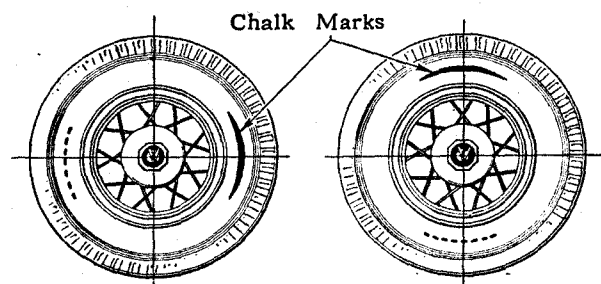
The front wheels should be turned on their bearings to bring the high spot or that portion of the tire with the greatest run-out toward the front or rear as shown at the left when checking caster, camber, and knuckle pin inclination and at the top or bottom as shown at the right when checking toe-in and toe-out
